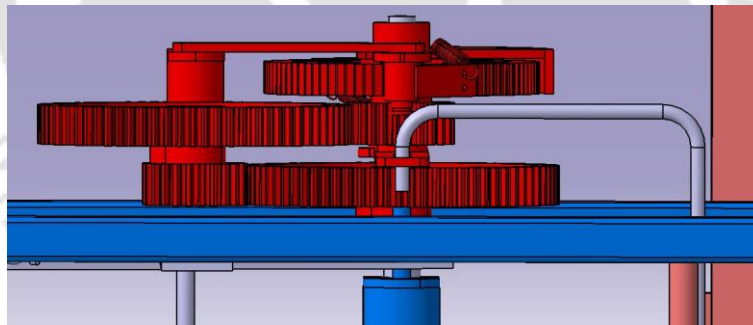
5-Wheel gear mechanism top view of the alpha model of semi-automatic handloom
